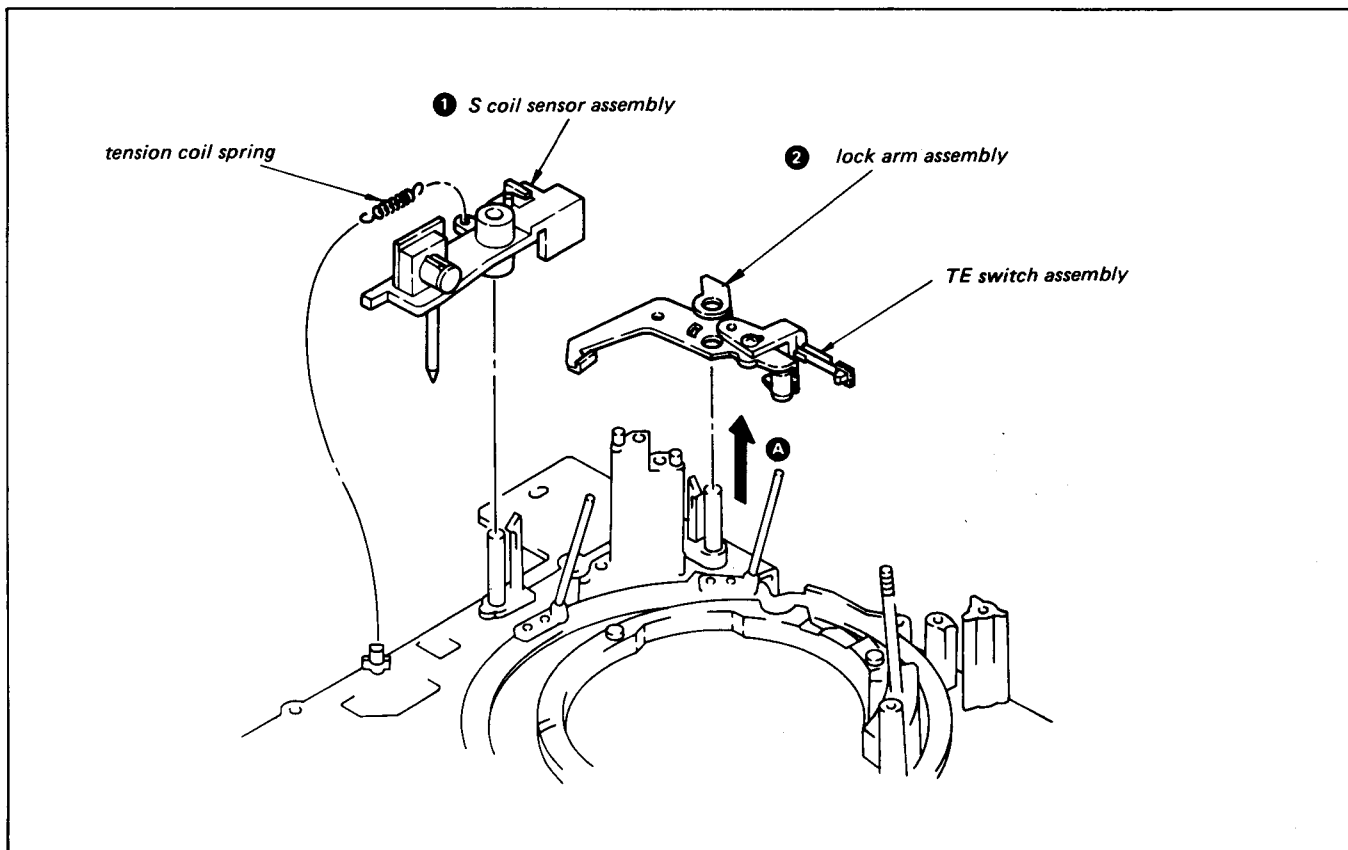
Removal of the TE switch assembly and lock arm assembly
